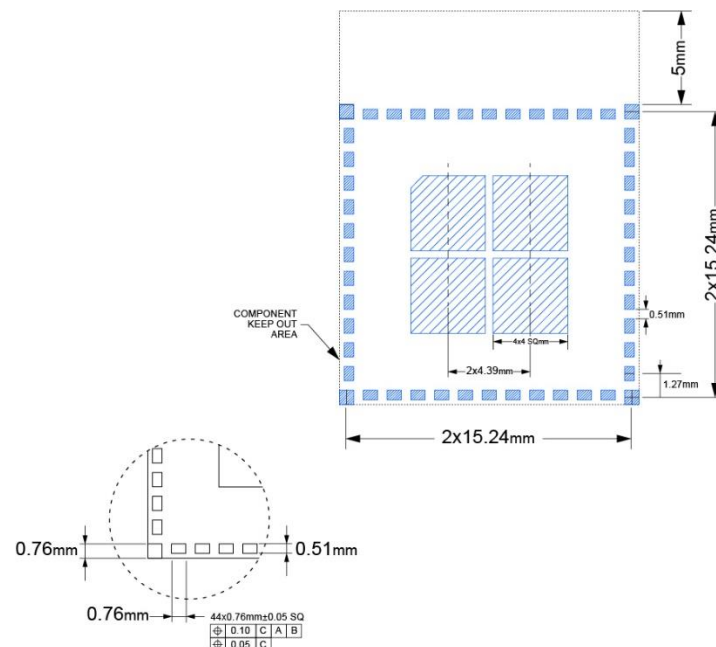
MQM744/748-0-50-0B Module PCB Landing Pattern
